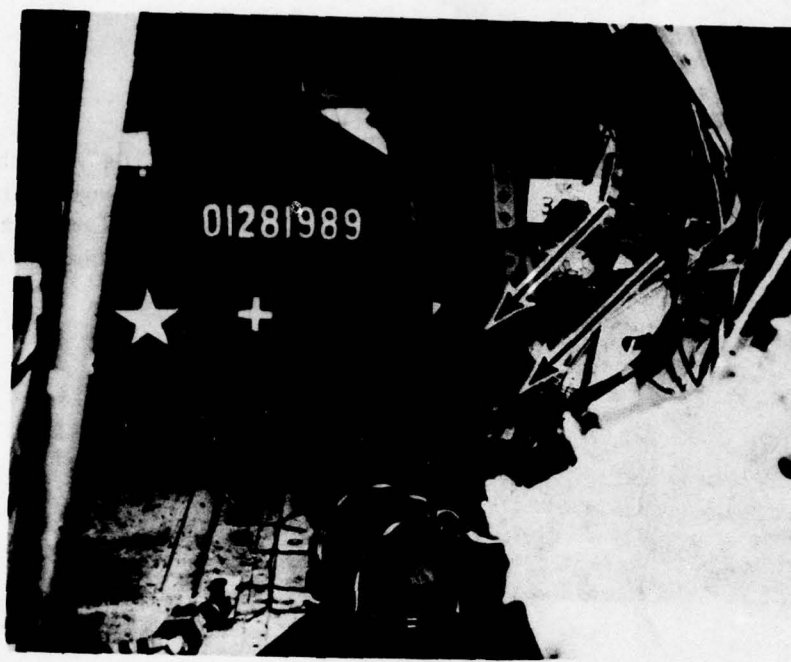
CH-47A Crash Test – View Showing Failure of Frame Corner Joint Area, Aft Cabin Section.
